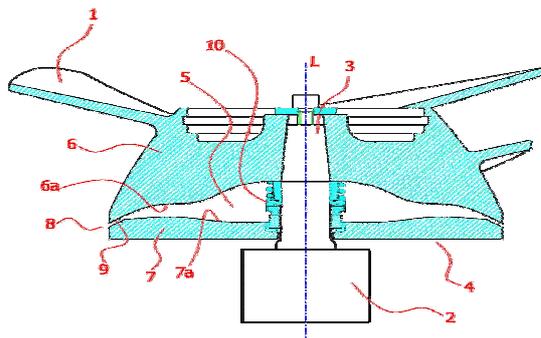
GM30 impeller and seal chamber improved geometry [13]
